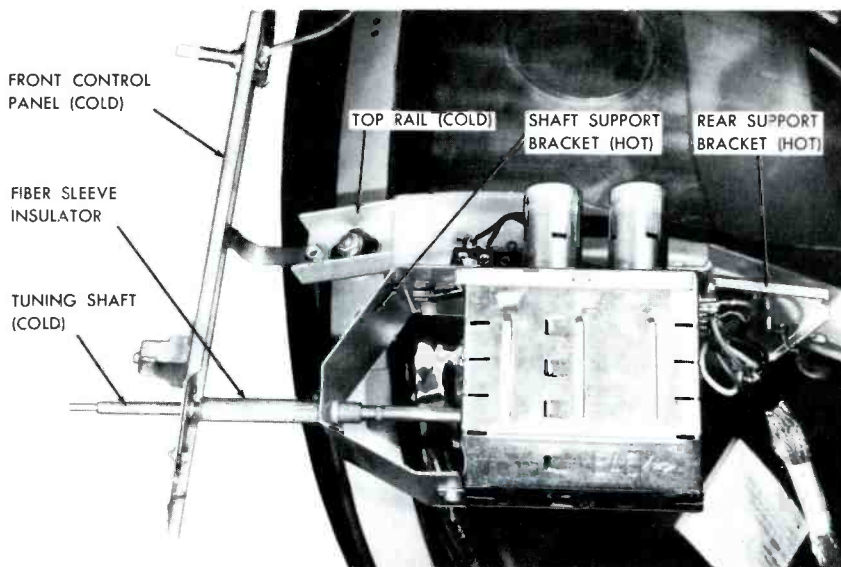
Tuner Assembly Employed in Westinghouse Chassis V-2342.
